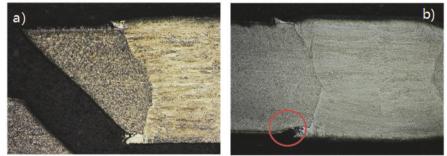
Microscopic Observation Photos of Weld Seam Cracking: a) Fracture surface, b) Crack surface
